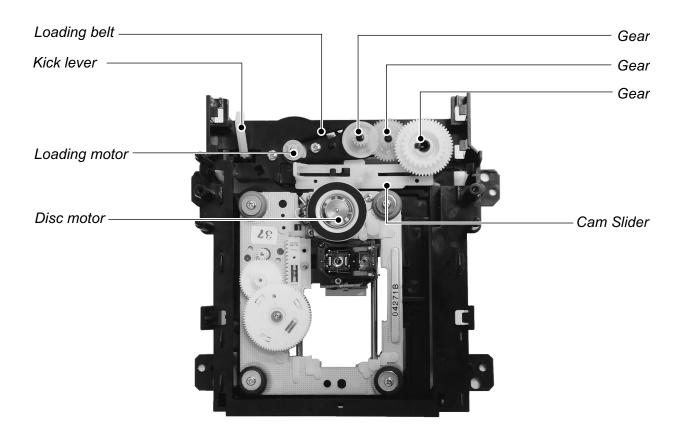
Mechanism chassis assembly (Internal side)
